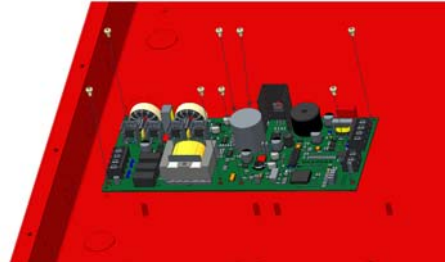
TR-INT50W mounted in the FACP Cabinet under the Main Control Board
